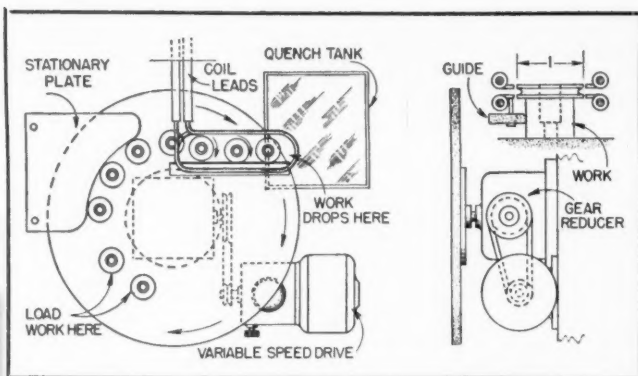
Drawing of a rotary table unit for progressively feeding parts through a heating coil.
